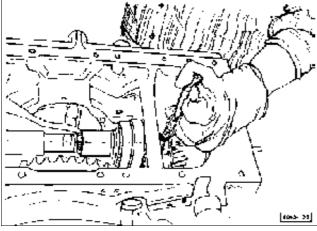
Position the spacer in contact with the gear so that the circlip seat of the 540 rpm gear uppermost remains fully exposed.
